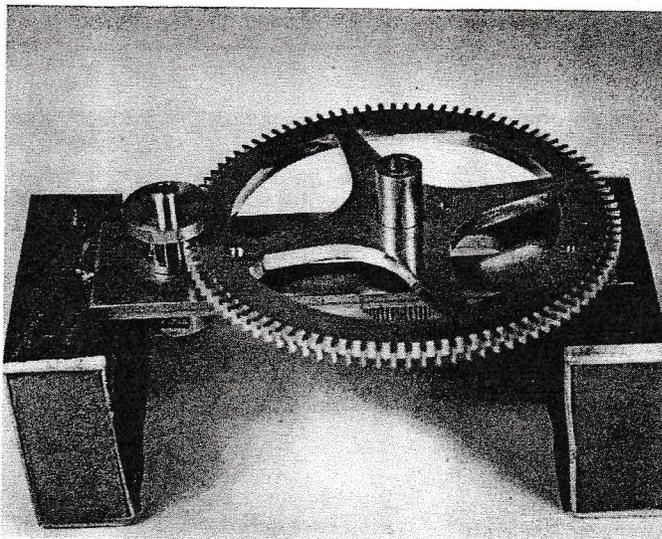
The tool in use depthing a wheel with a lantern pinion.
